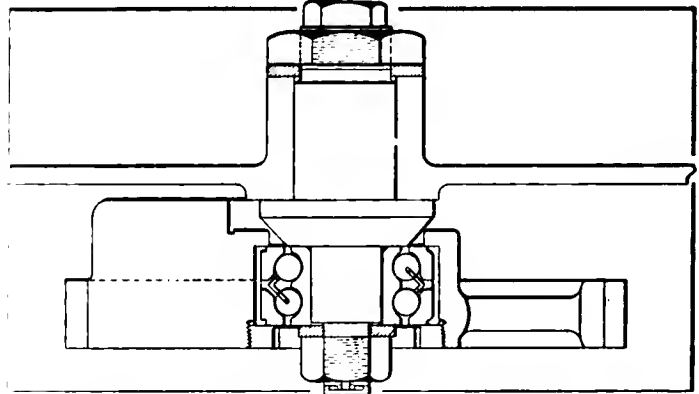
Auxiliary balance gear showing New Departure ball bearing and eccentric spindle with adjusting nut outside
